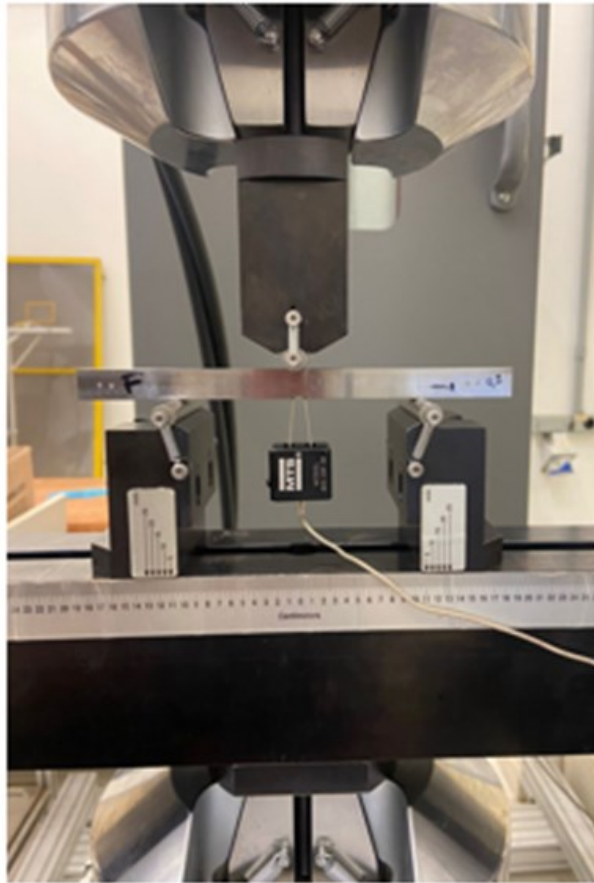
SE(B) specimens machined from weld joint material mounted in MTS test machine during fatigue crack propagation testing for $S/W = 8$.
